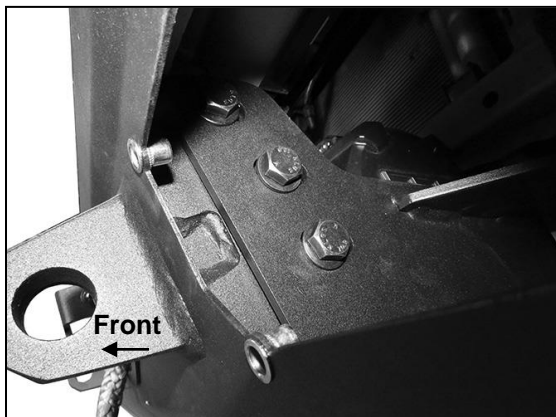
Attach License Plate Bracket to front of Bumper and cable guide (not pictured)
